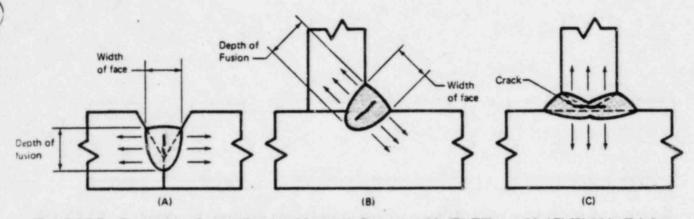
Examples of centerline cracking: (A) Groove weld; (B) Fillet weld; (C) Weld in T-joint
